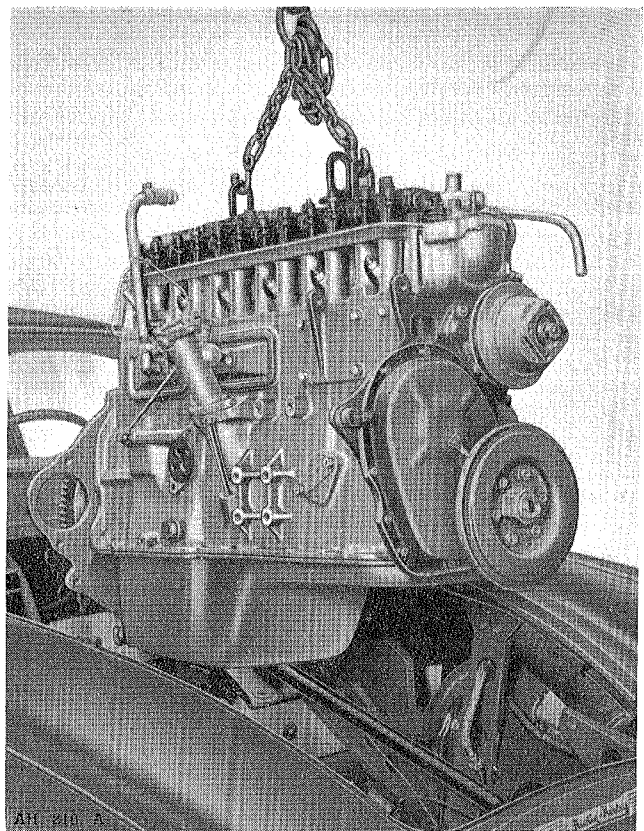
Showing the engine being removed at the correct lifting angle.
